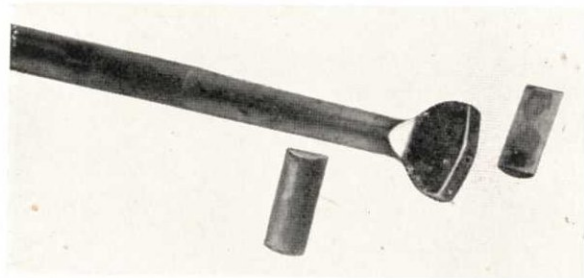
Rear axle shaft end and cylindrical segment for universal joint
